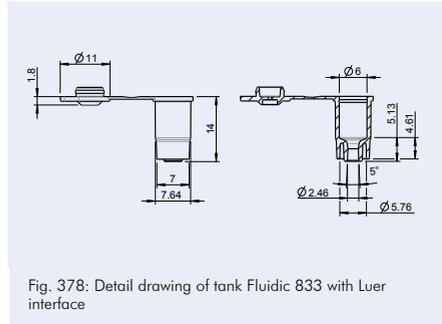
Detail drawing of tank Fluidic 833 with Luer interface
